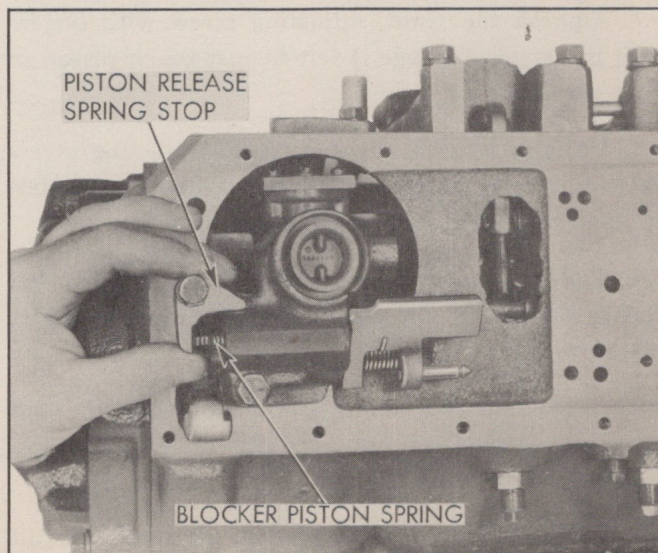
Installing Parking Blocker Piston Spring and Piston Release Spring Stop
